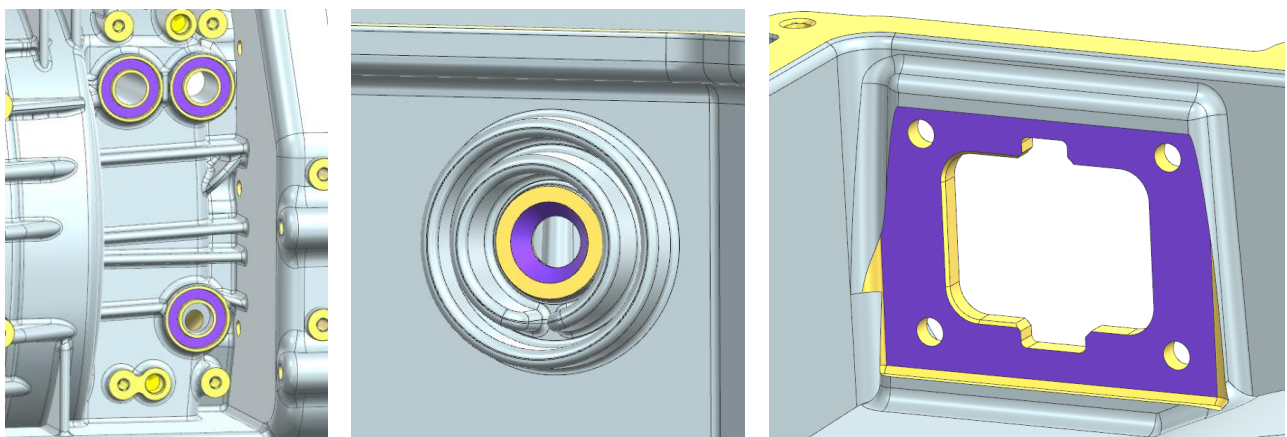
Coated surfaces for HEX-/PCE-/LV connector interfaces
